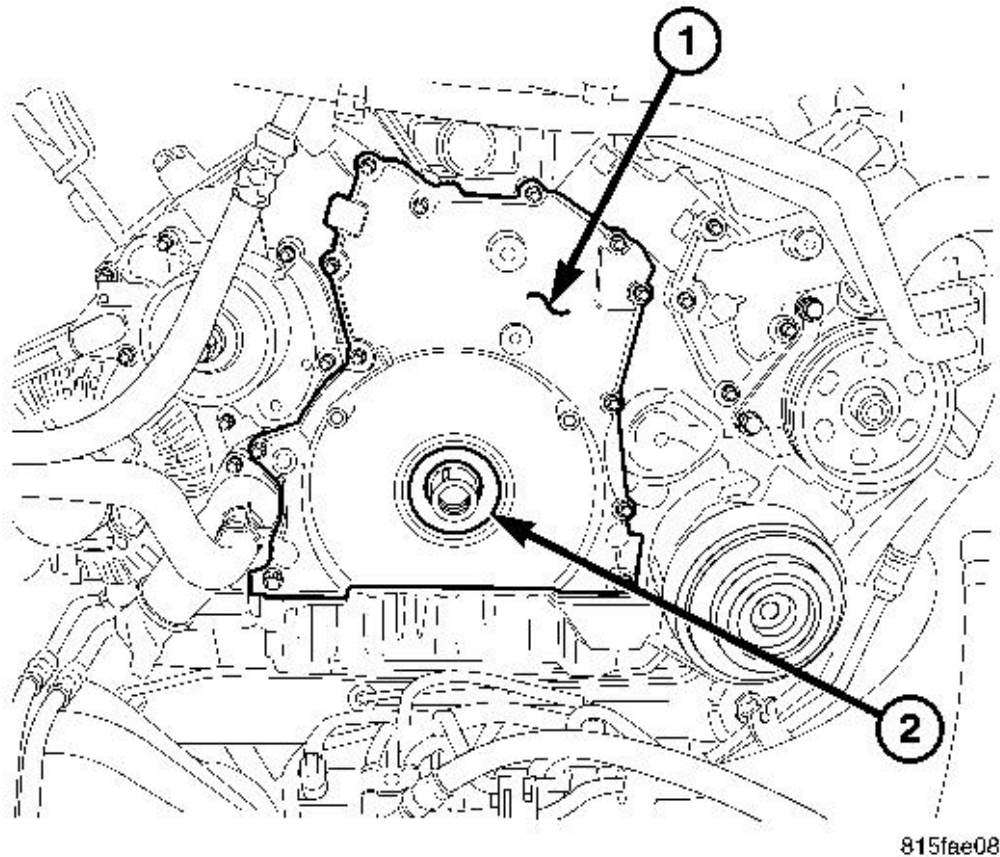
Timing Chain Cover & Front Crankshaft Seal
